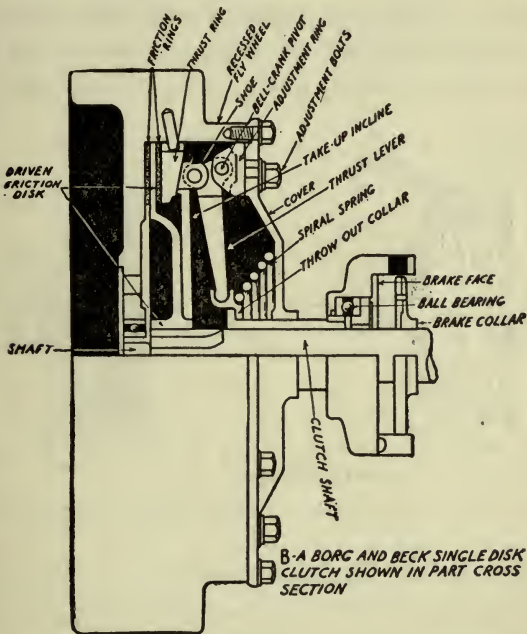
B.—HOW A SINGLE DISK CLUTCH IS MADE AND WORKS
